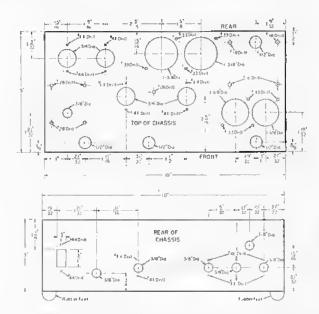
Drawings Shawing Locations of Hales in Chassis and Front Panel.
